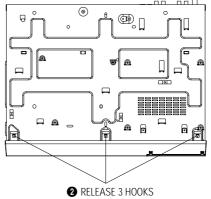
Ass'y Front Panel Removal(Bottom View)
